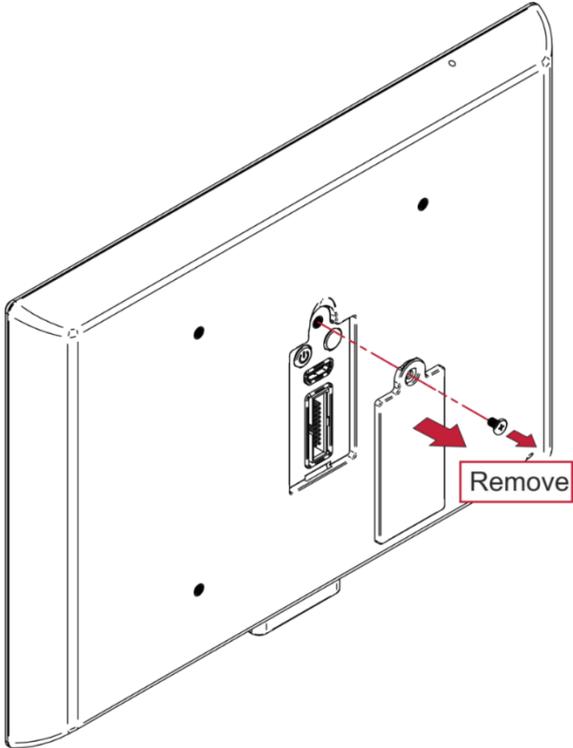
Removing the Cover on the KT-107S Rear Side
